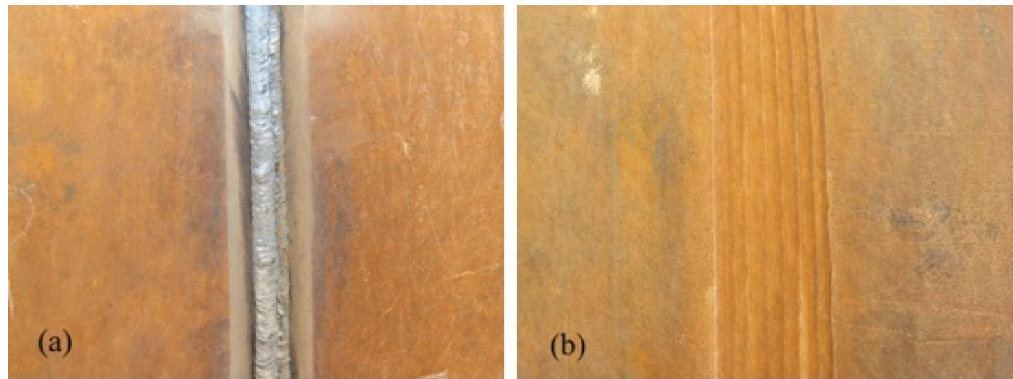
(a) Root pass welding of carbon steel pipe with SMAW process (b) the final weld bead with several passes done by column and boom manipulator SAW process [23]
